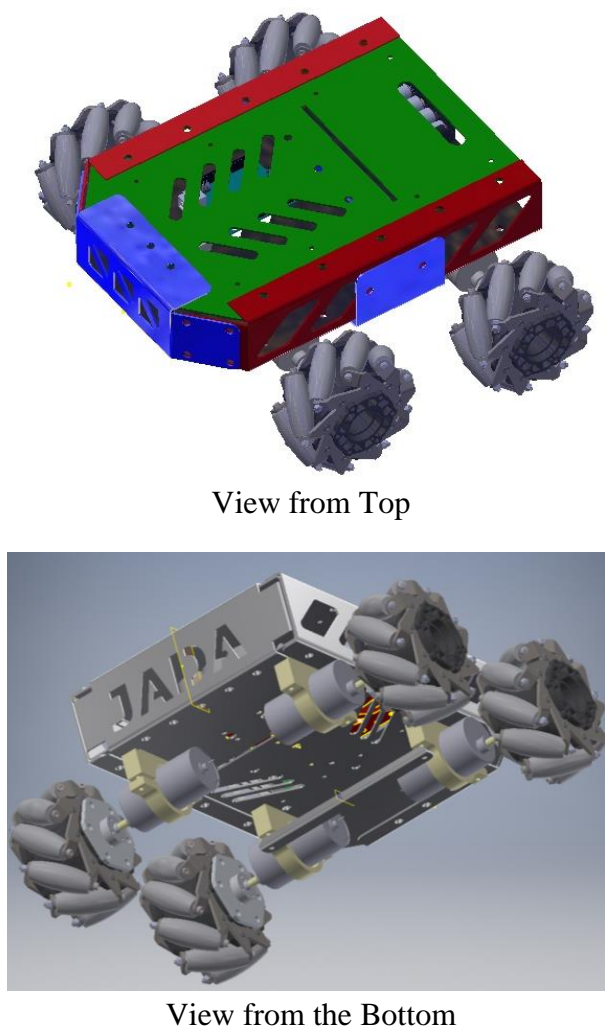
Computer-Aided Virtual Design Model of Robot Chassis using Sheet Metal
